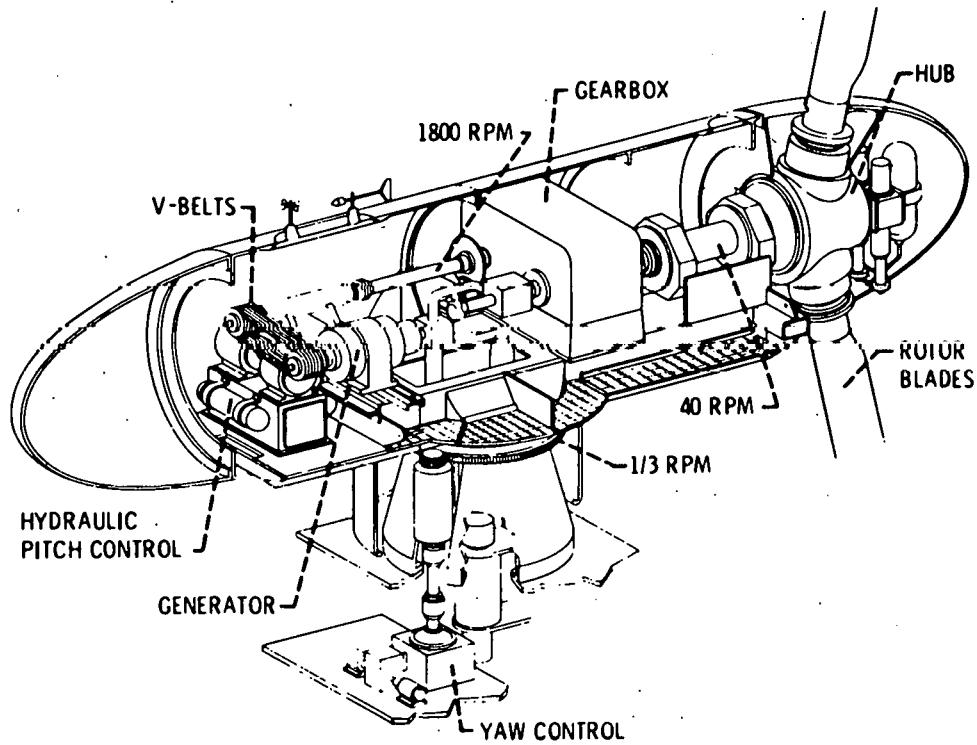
Internal Mechanisms of Horizontal-Axis Wind Turbine³
